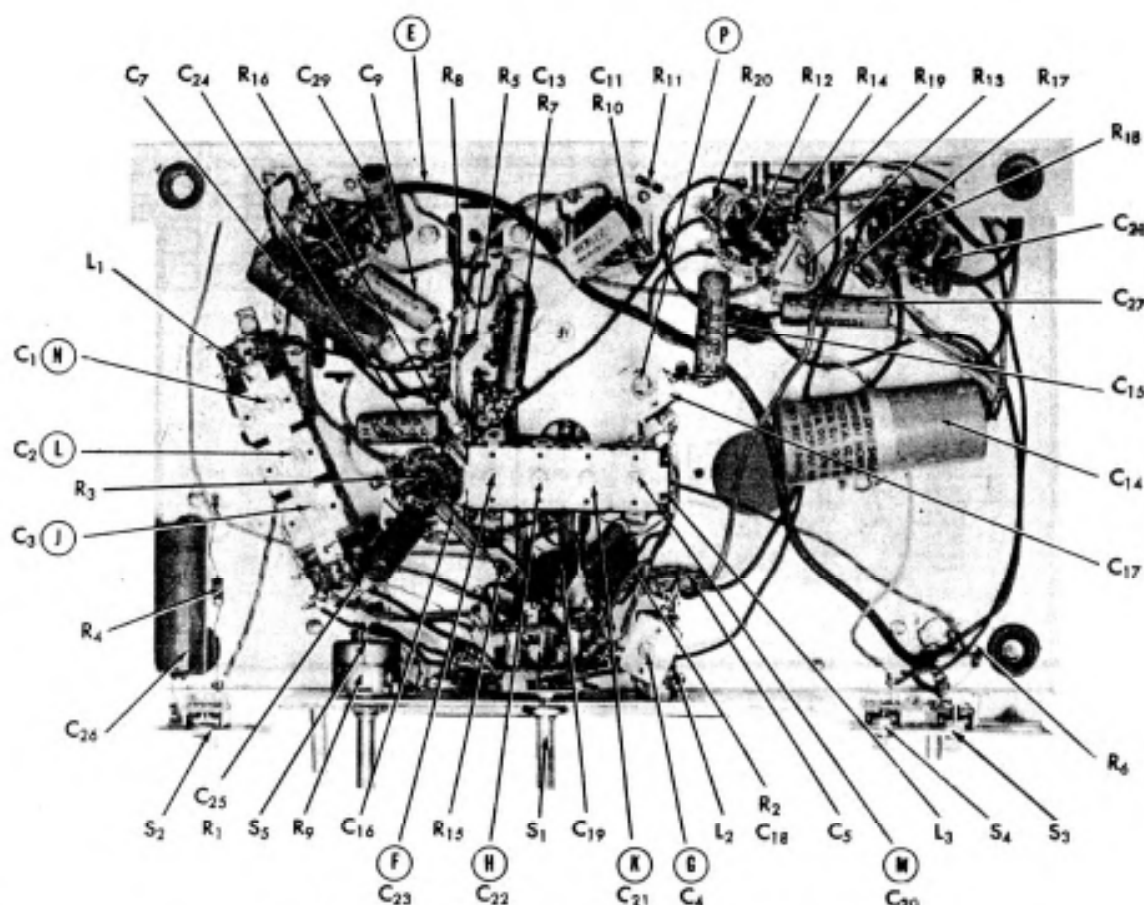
Bottom View of Chassis Showing Location of Alignment Adjustments and Components
